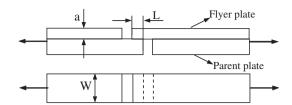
Schematic representation of tensile-shearing test in accordance with the ASTM D 3165-95.
